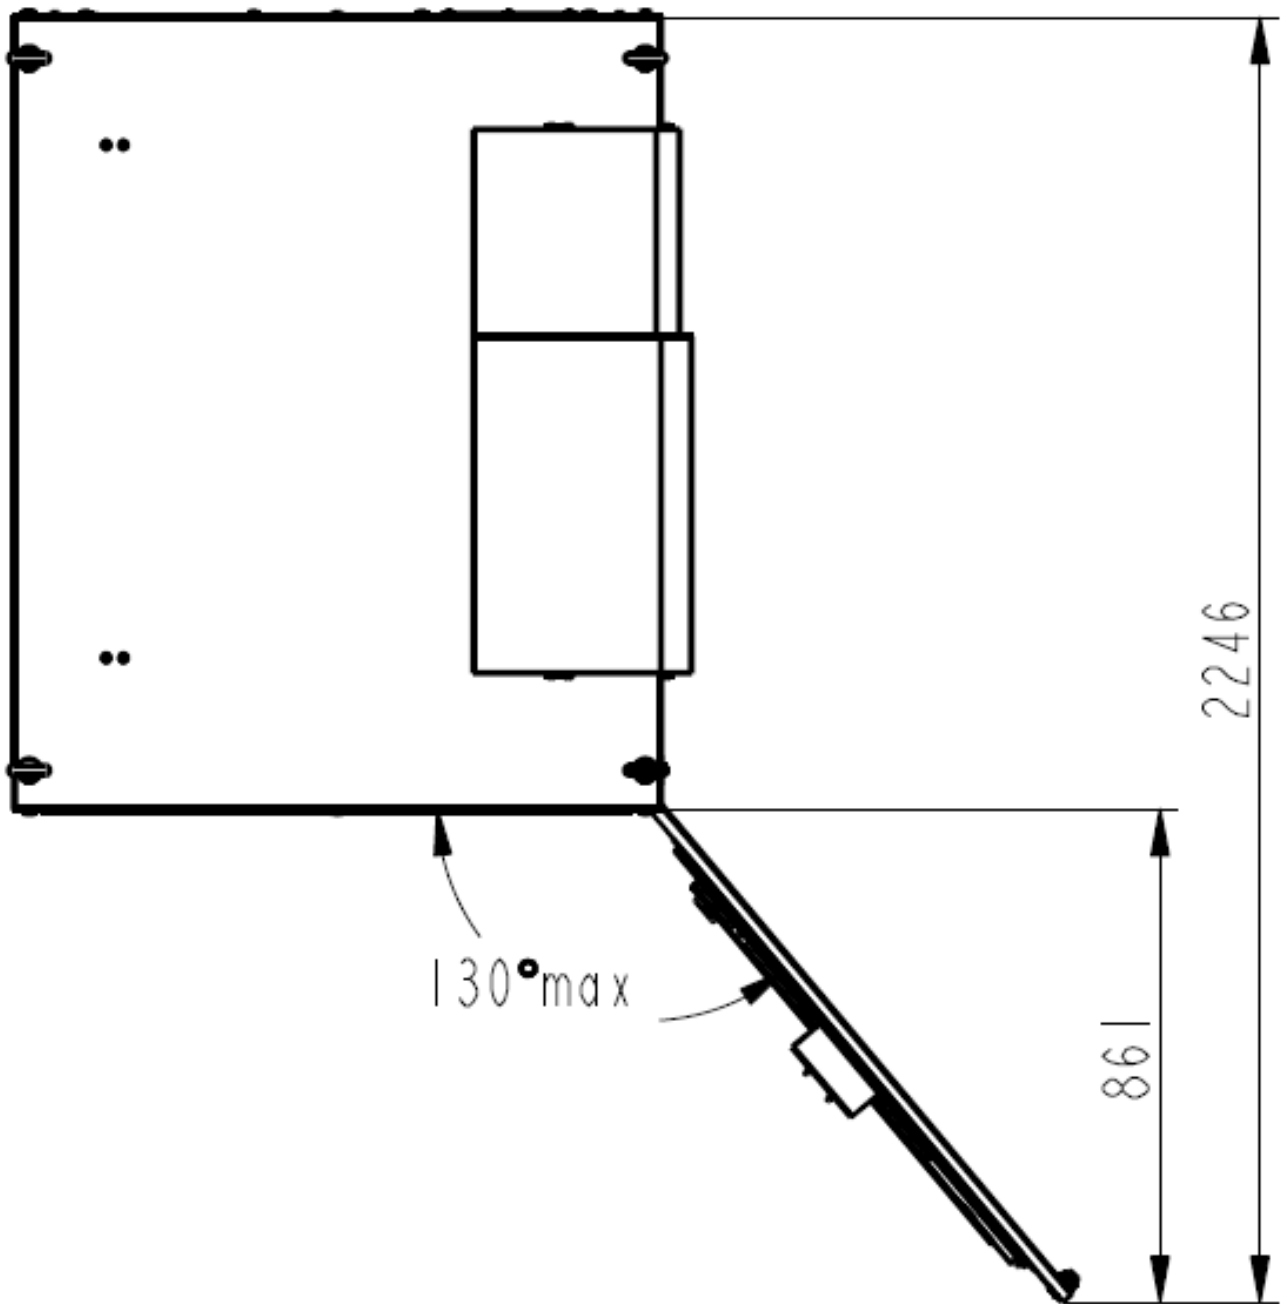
Opening Angle And Distance Of The Cabinet Door (Top View)
